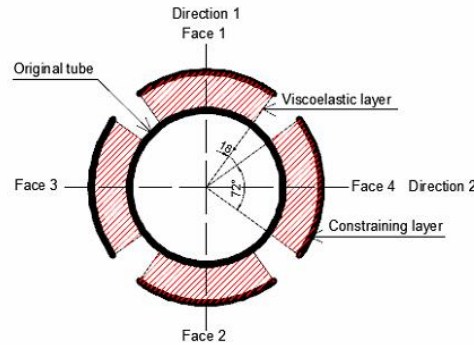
Tubular cross section of the sandwich beam structure (not to scale)
